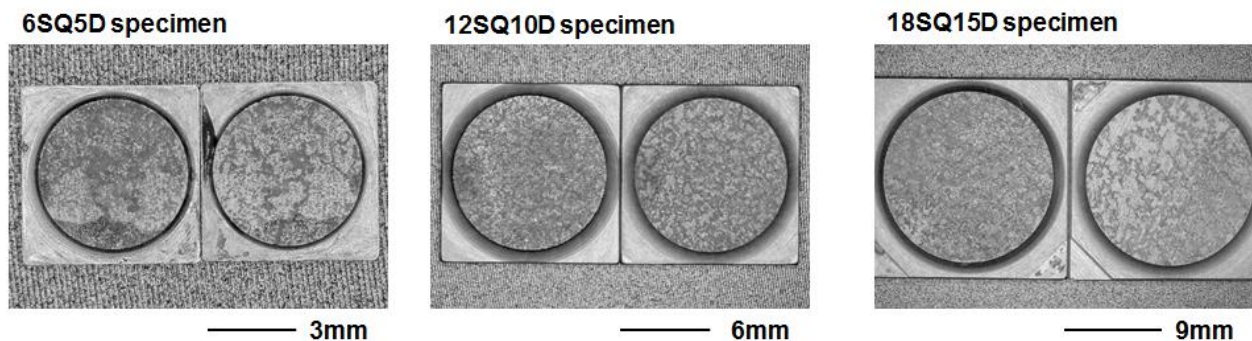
Typical fracture appearances of torsional tested specimens. The specimen IDs are shown in Fig. 1, and scale marks under each photo indicate sizes for the tested specimens.
